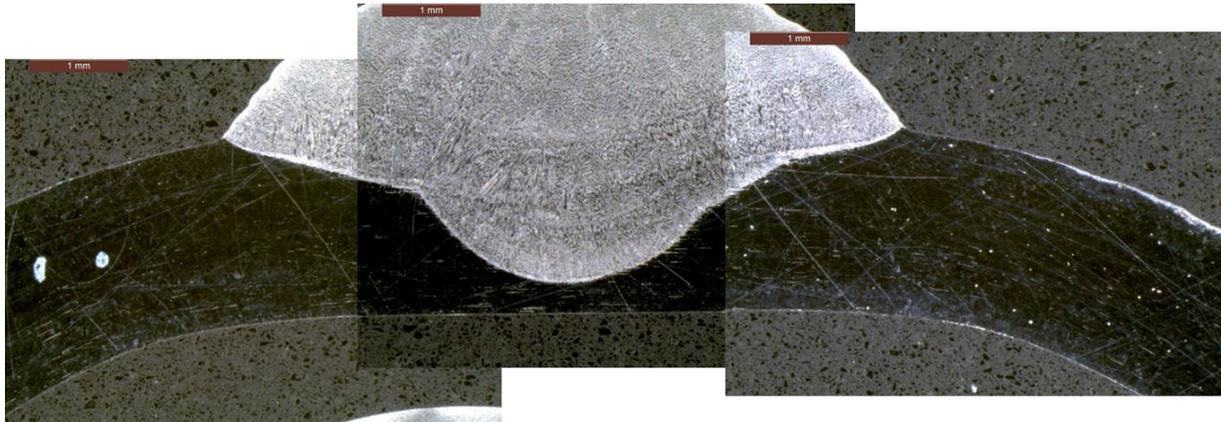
Cross section of weld on U-bend on SS316L
